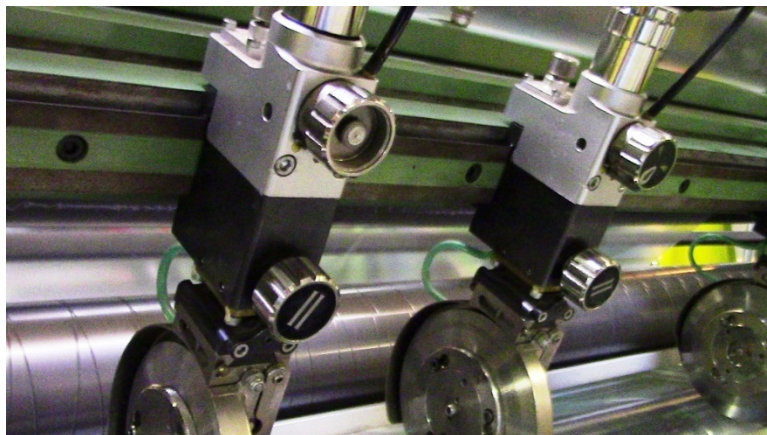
Slitting blades fixed on slitter-rewinder machine [2]
